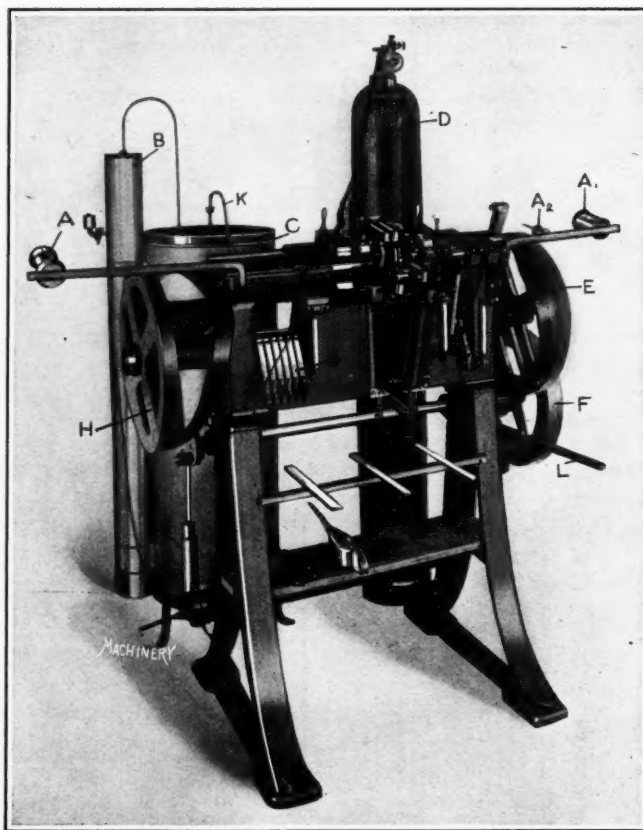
Automatic Machine for welding Lead-in Wires
